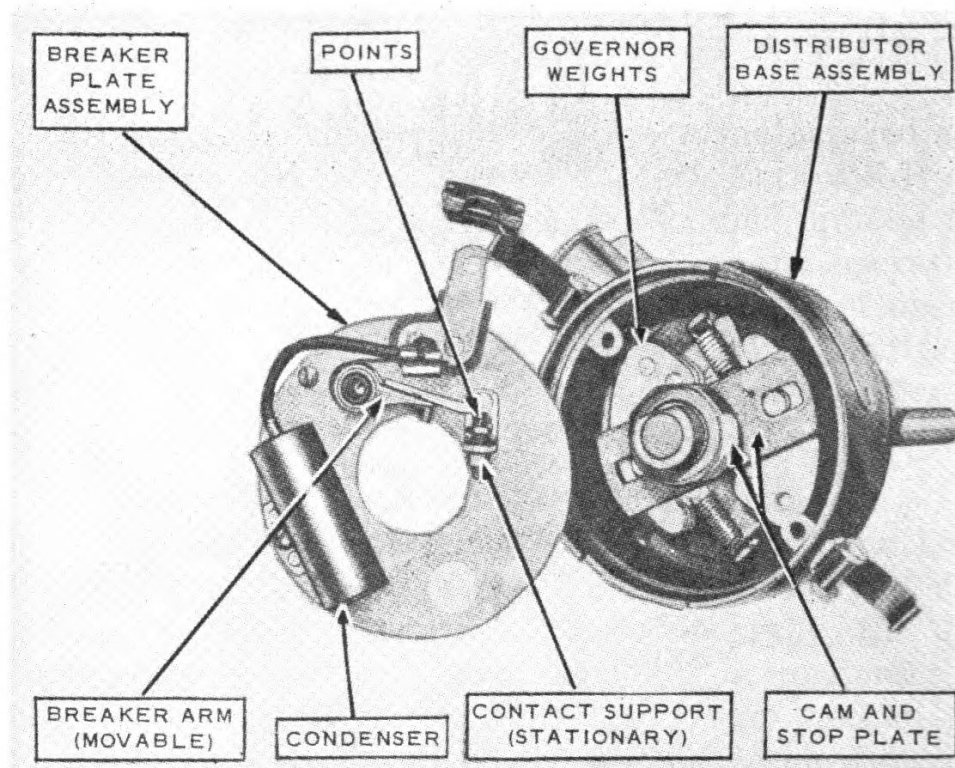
Breaker-plate assembly (Chrysler M8).
